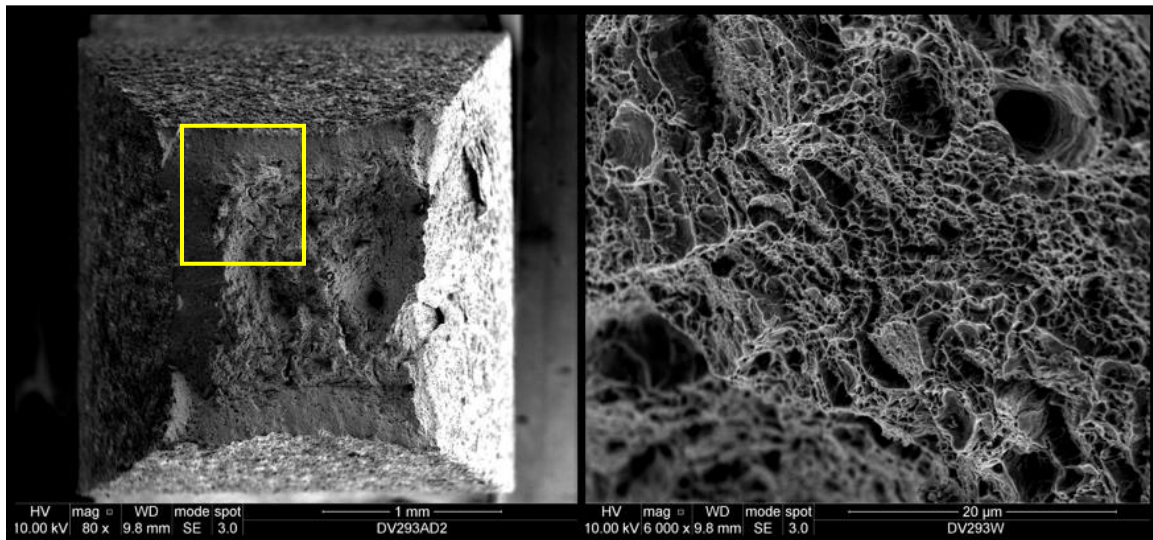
Wrought Normalized and Tempered (base case) fracture surface showing shear lip and ductile fracture dimples.
